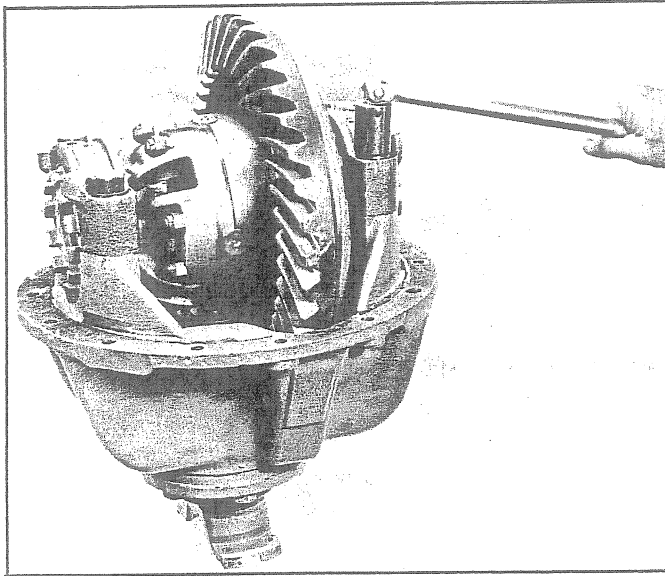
Tightening Bolts Prior to Adjusting Bearing Preload
